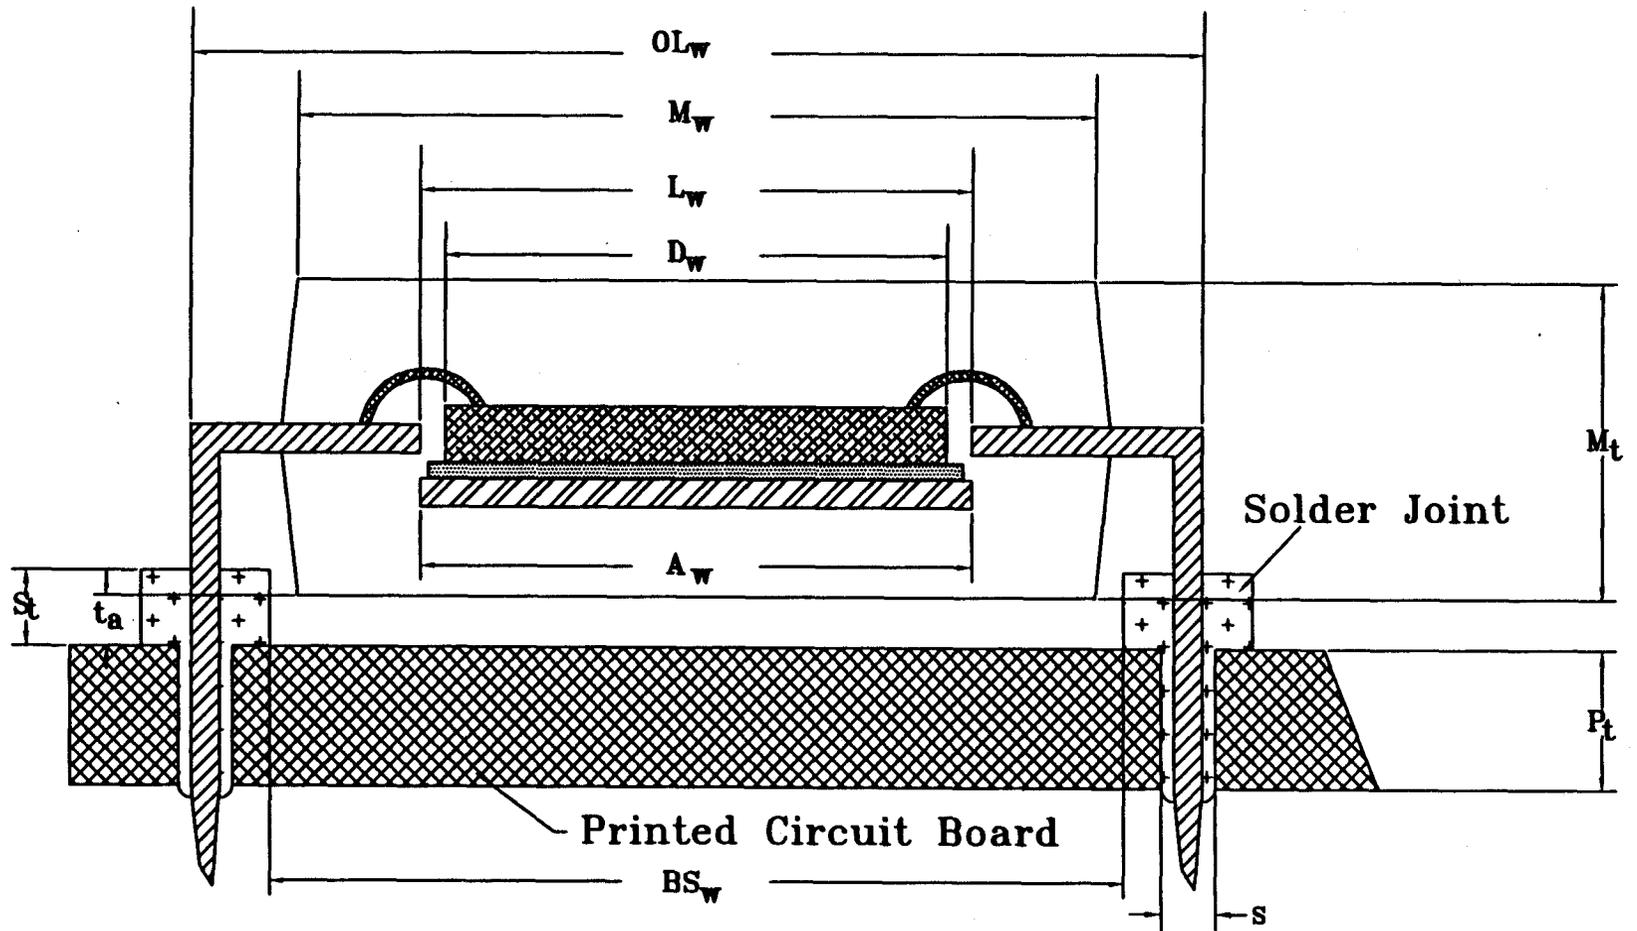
Cross-section view of a through-hole mounted IC package.
